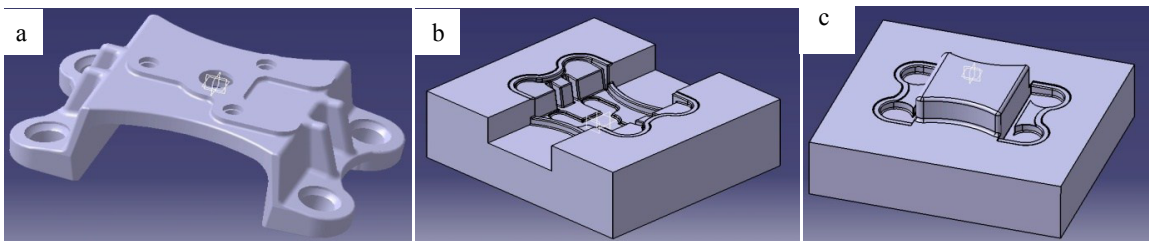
3D CAD model of (a) connecting rod; (b) Bottom Die; (c) Top Die
